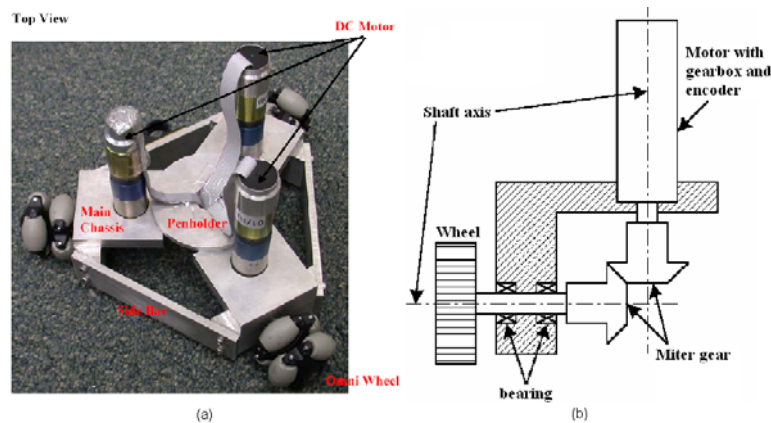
(a) Three wheel OWMR I; (b) OWMR I main mechanical drive.
